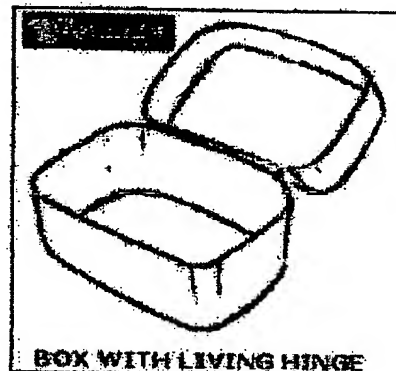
A, 1B. Without a living hinge, this box would require two moulds, two moulding operations, and assembly.
